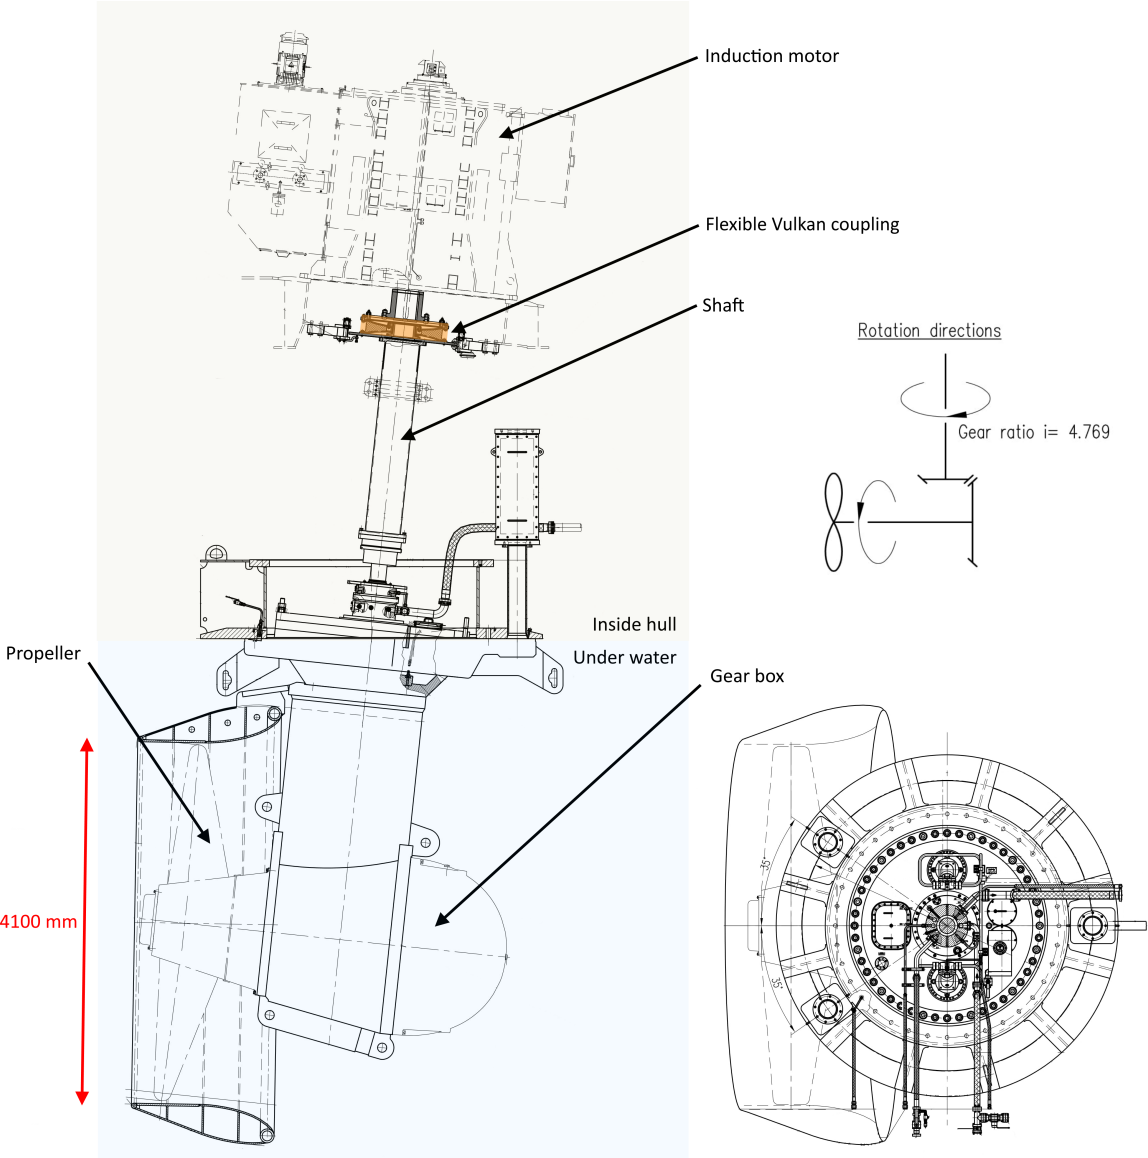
Overview of the thruster assembly as used on the PS [26], [27]
